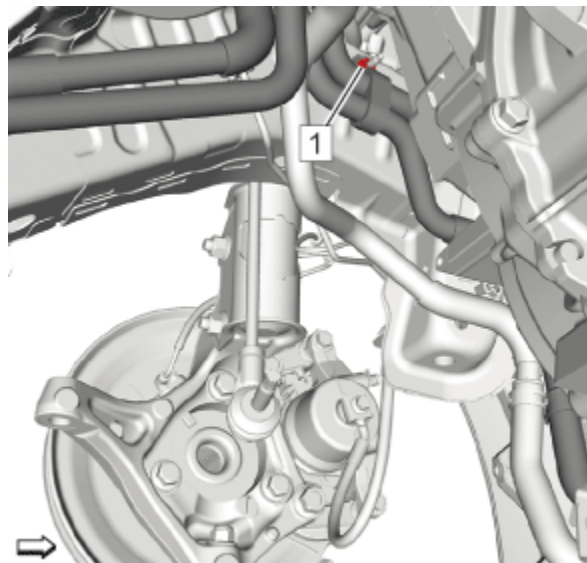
Drive Motor Generator Control Module Cooling Outlet Hose And Nut
